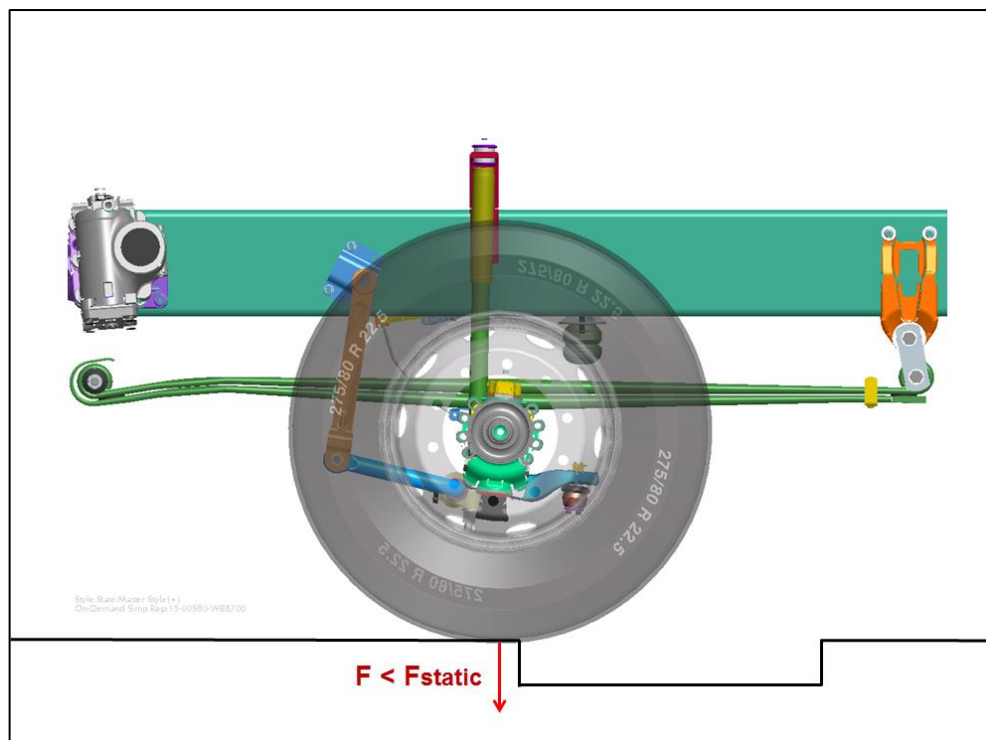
Dynamic vertical load applied to the pavement - F lower than static load.
